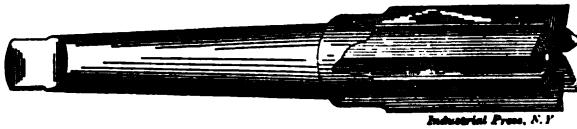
End Mill with Center Cut, suitable for Accurate Drilling
